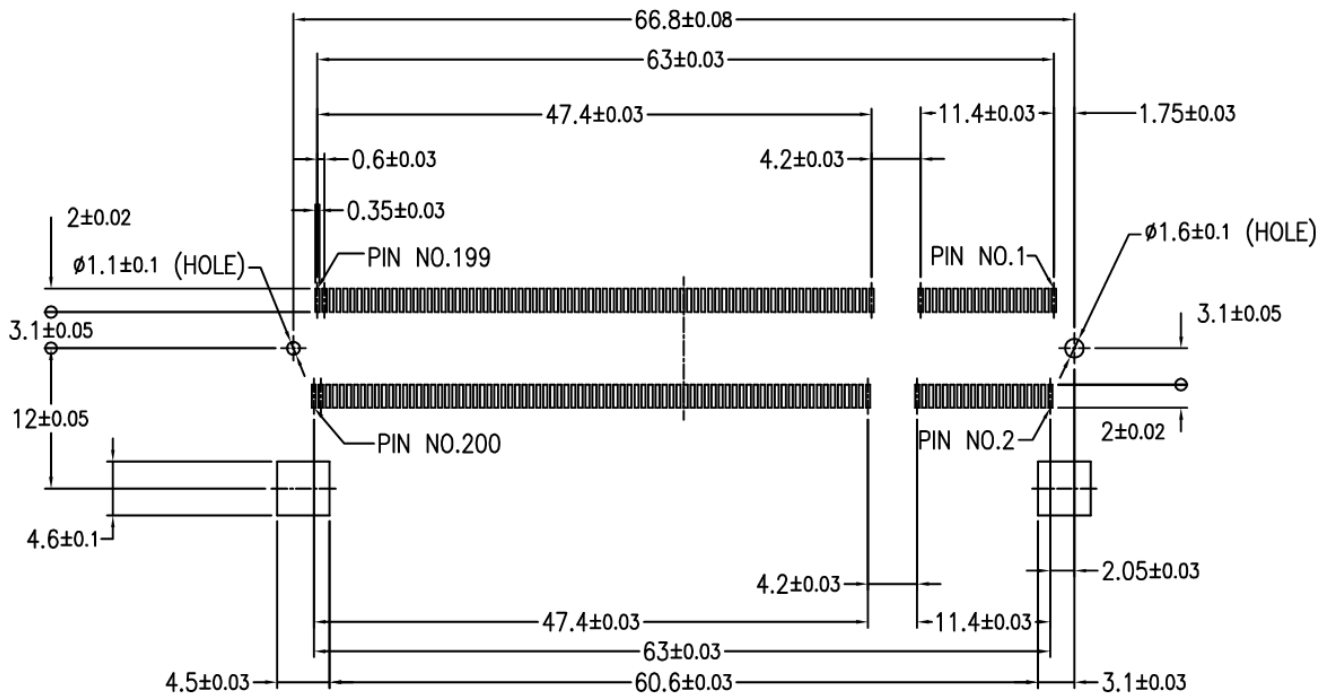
FCI 10033853-152FSLF Recommended PCB Footprint
